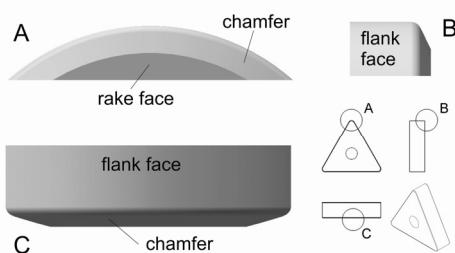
Cutting tool geometry of tool nose embracing chamfered corner:
